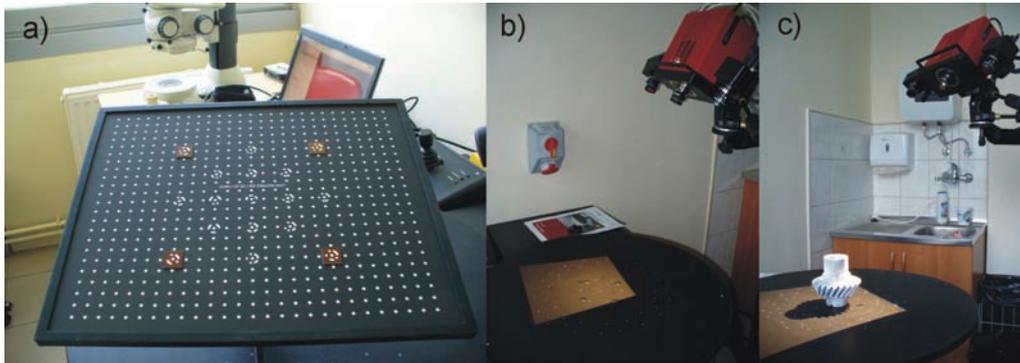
Measurement with the rotary table: a) calibration, b) turntable calibration, c) measurements of gear
